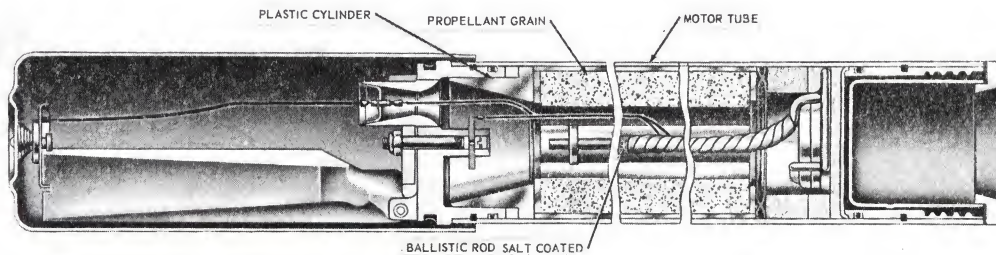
2.75-Inch Rocket Motor Mk 40 Mod 0, Sectional View.
